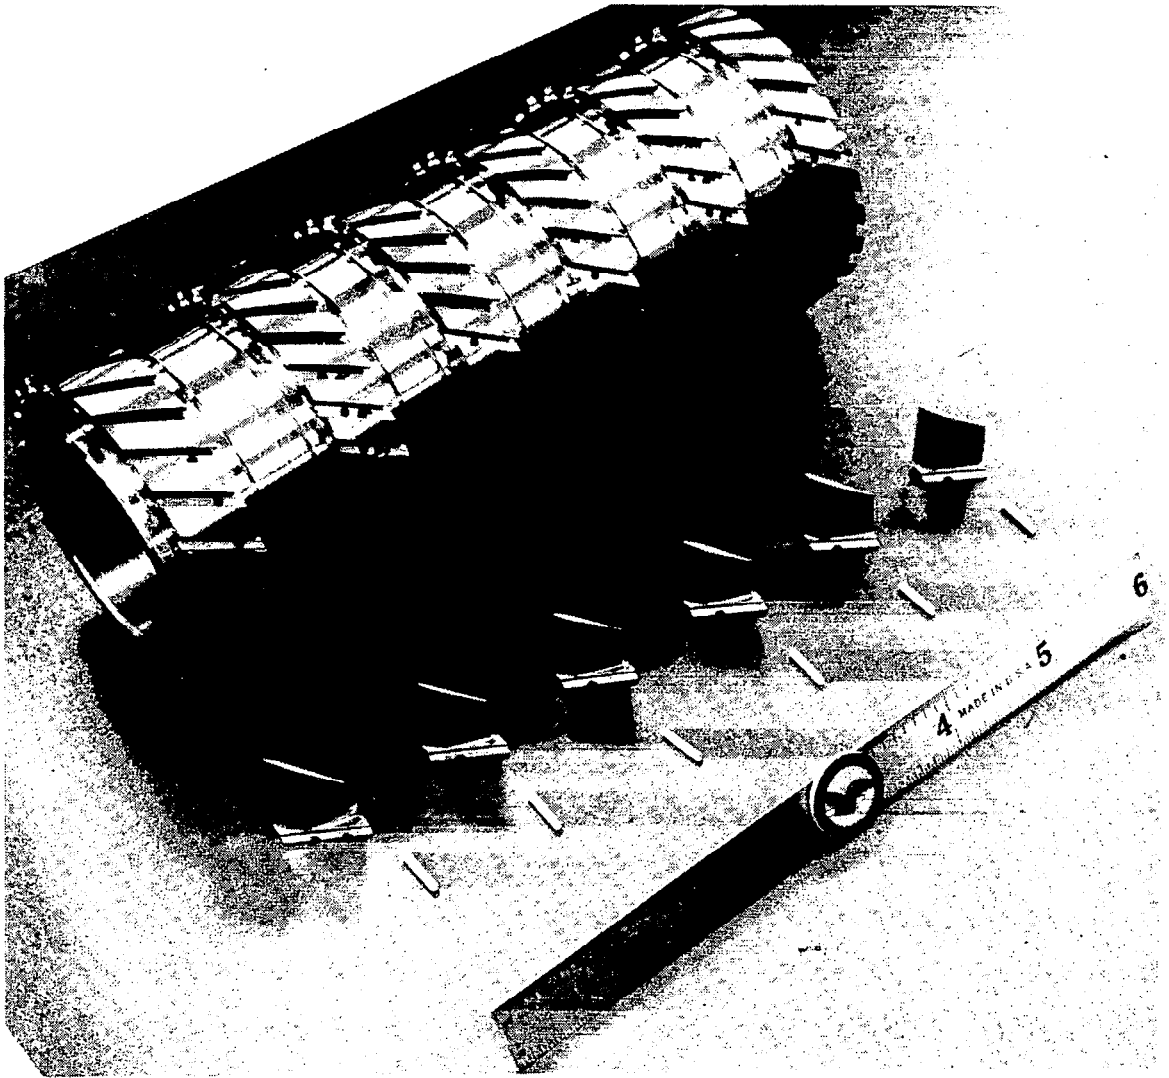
Compressor Research Package Disk, Blades, and Lock Pins
